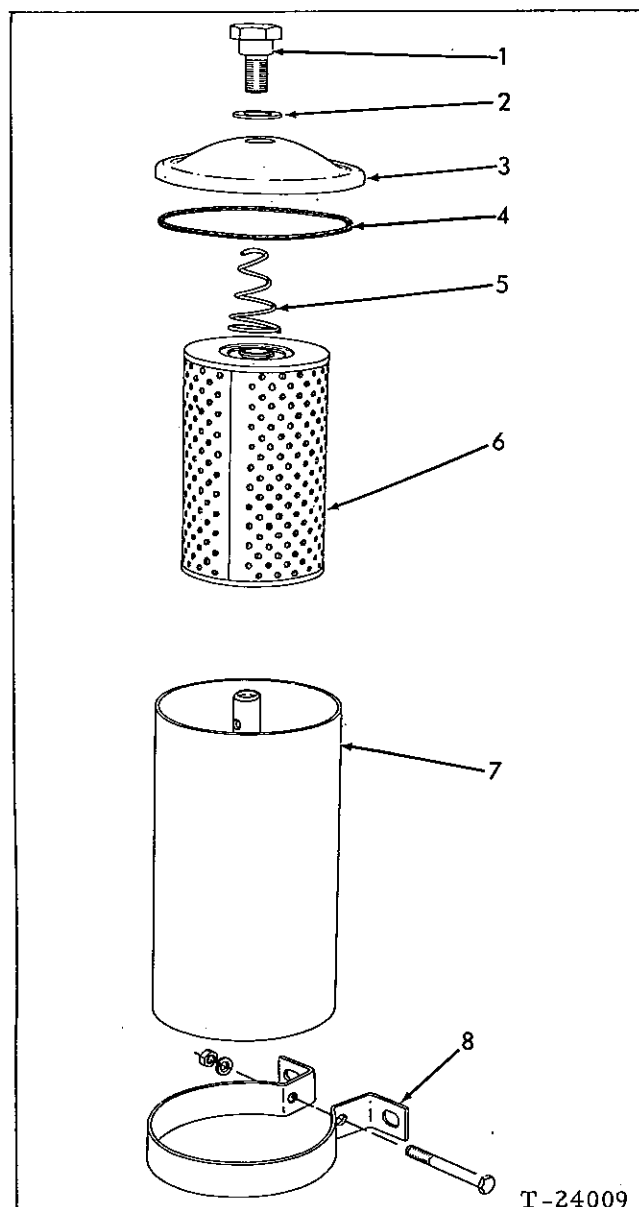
HEAVY-DUTY FUEL FILTER PARTS
